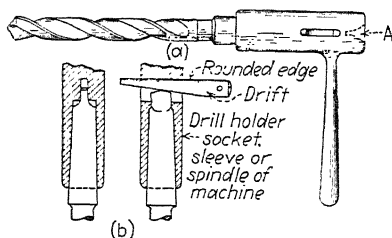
(a) Drill holder, fits the taper shanks of drills and machine reamers. Has a large center hole at A and is provided with a suitable handle. In (b) is illustrated how the taper shank fits in the holder, and also the use of the drift to remove the drill.
